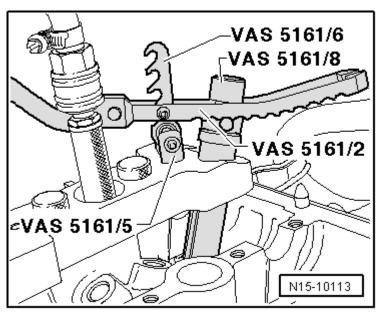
Identifying Pressure Forks VAS 5161/2 Engaged
